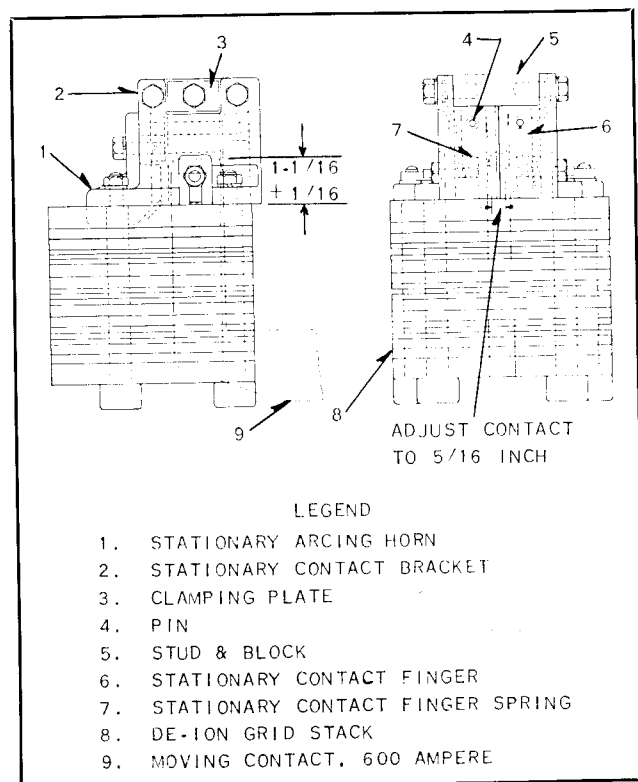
"De-ion Grid" and Contact Assembly, 600-Ampere
